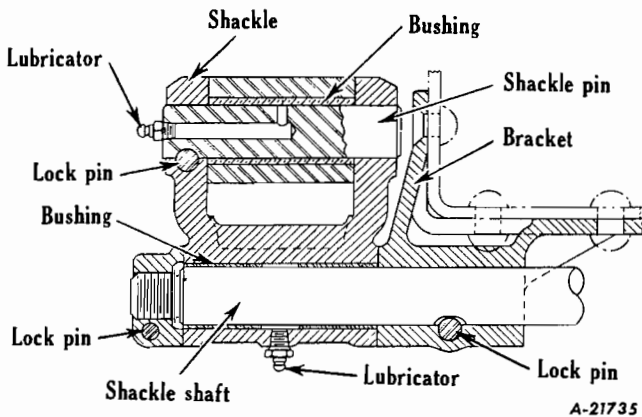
Rear Spring Rear Shackle For Models L-180, L-183, L-184, L-185, LC-180, L-190, L-193, L-195.
